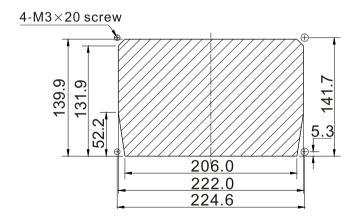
Dimensions of opening and fixing holes for flush mounting
